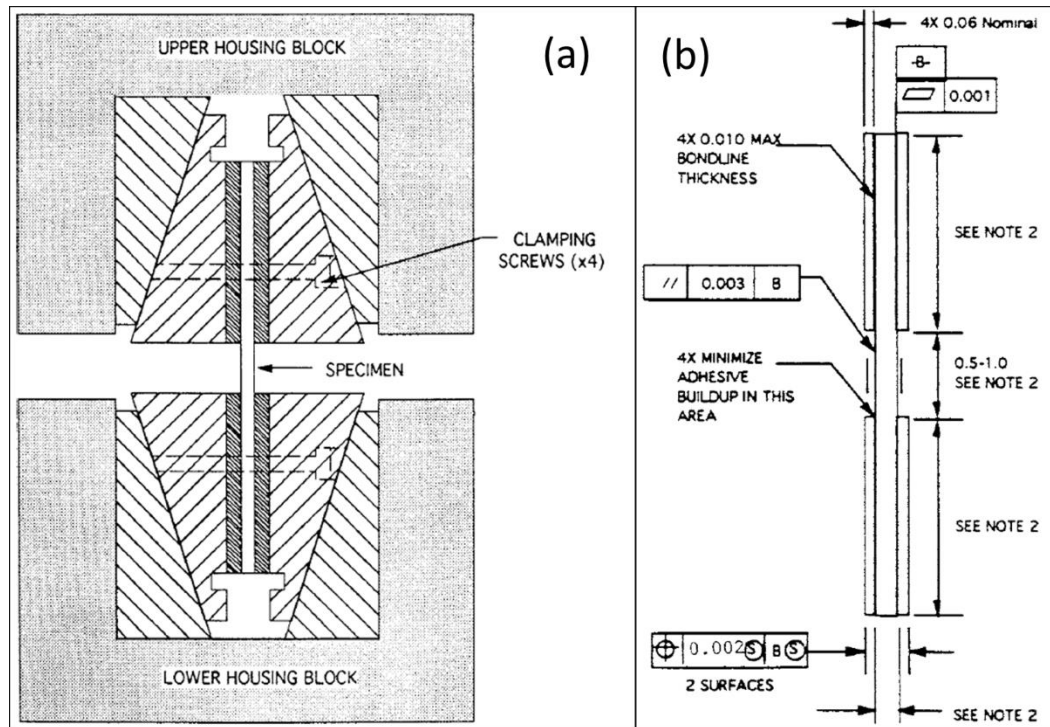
ASTM D3410 (a) test fixture and (b) tabbed test specimen [15]
